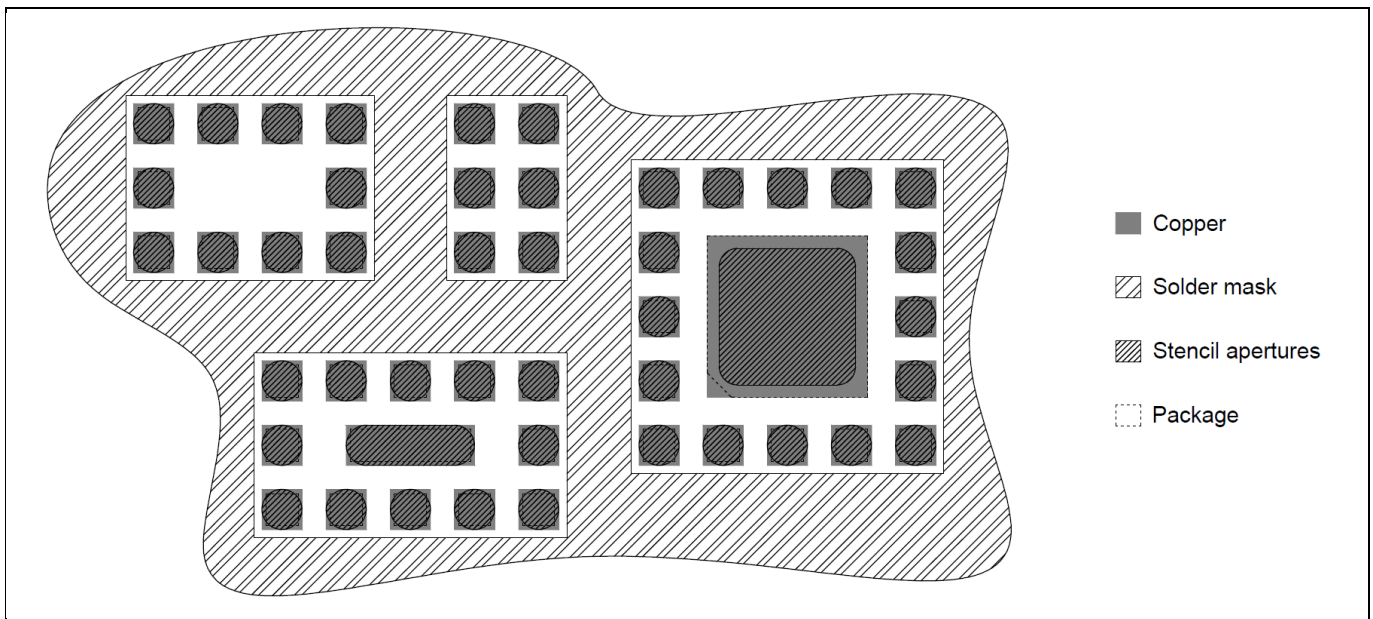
Example of the land grid array configuration of TSLP, ATSLP and LGA PCB pads. Solder mask dams in between the pads are often stated as being optional. Their use depends on the specific board manufacturing and board assembly processes.
